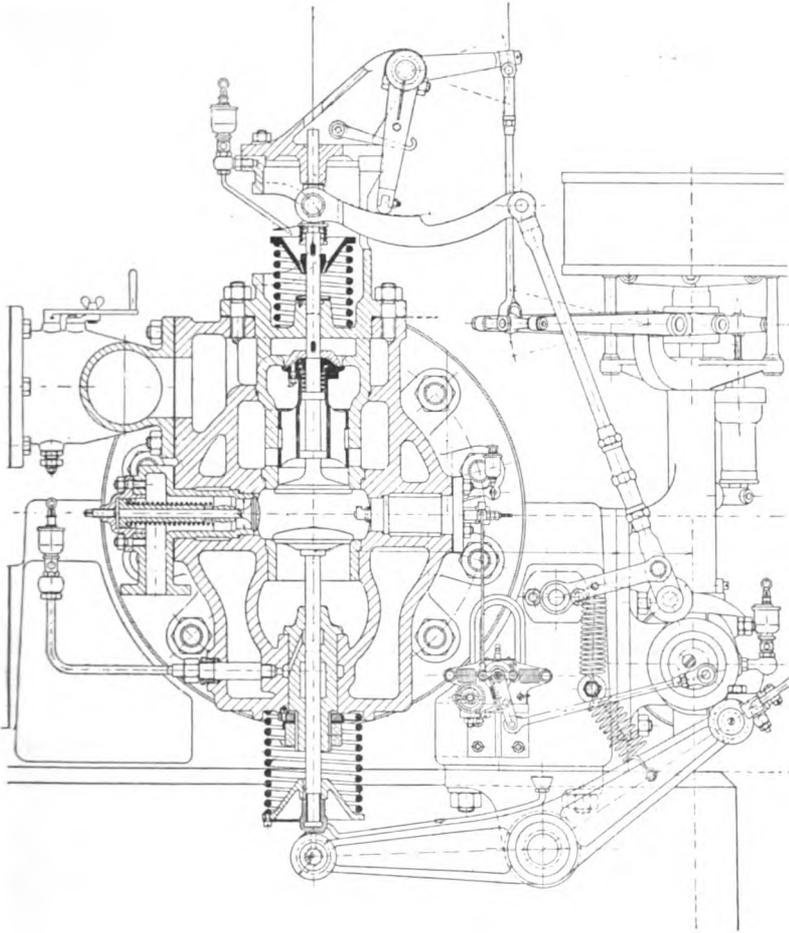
Section of Combustion Chamber, Gasmotoren Fabrik Deutz.
